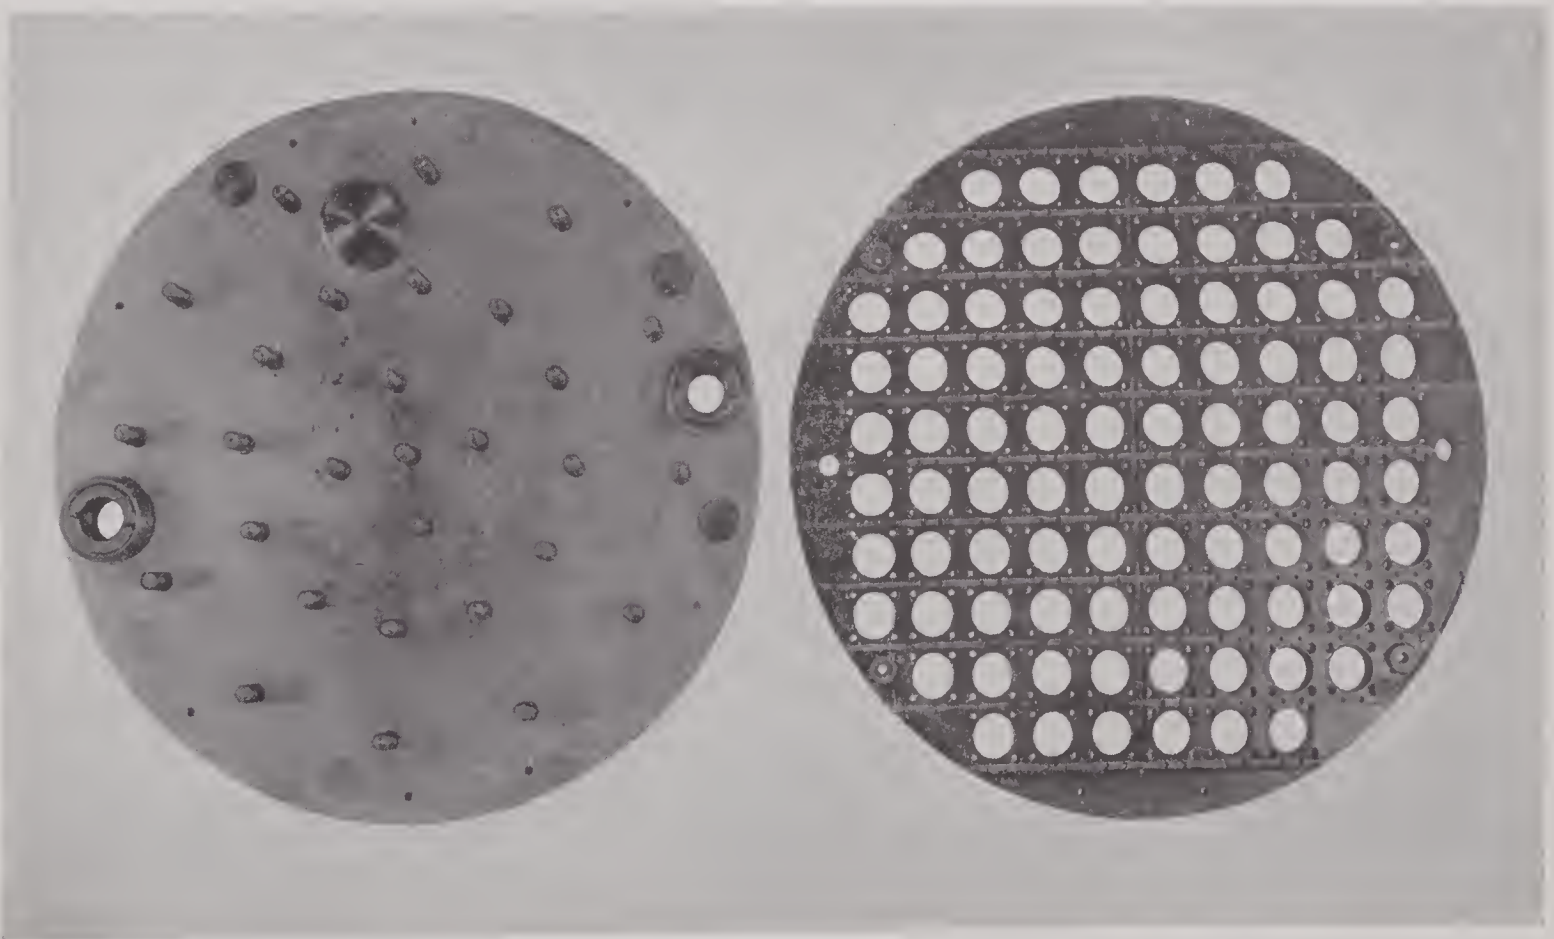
Right, bakelite disk to which the separate units are attached, including left, part of a rubber sandwich used to seal the portion of the transducer containing castor oil from the remainder. (NRL.)
